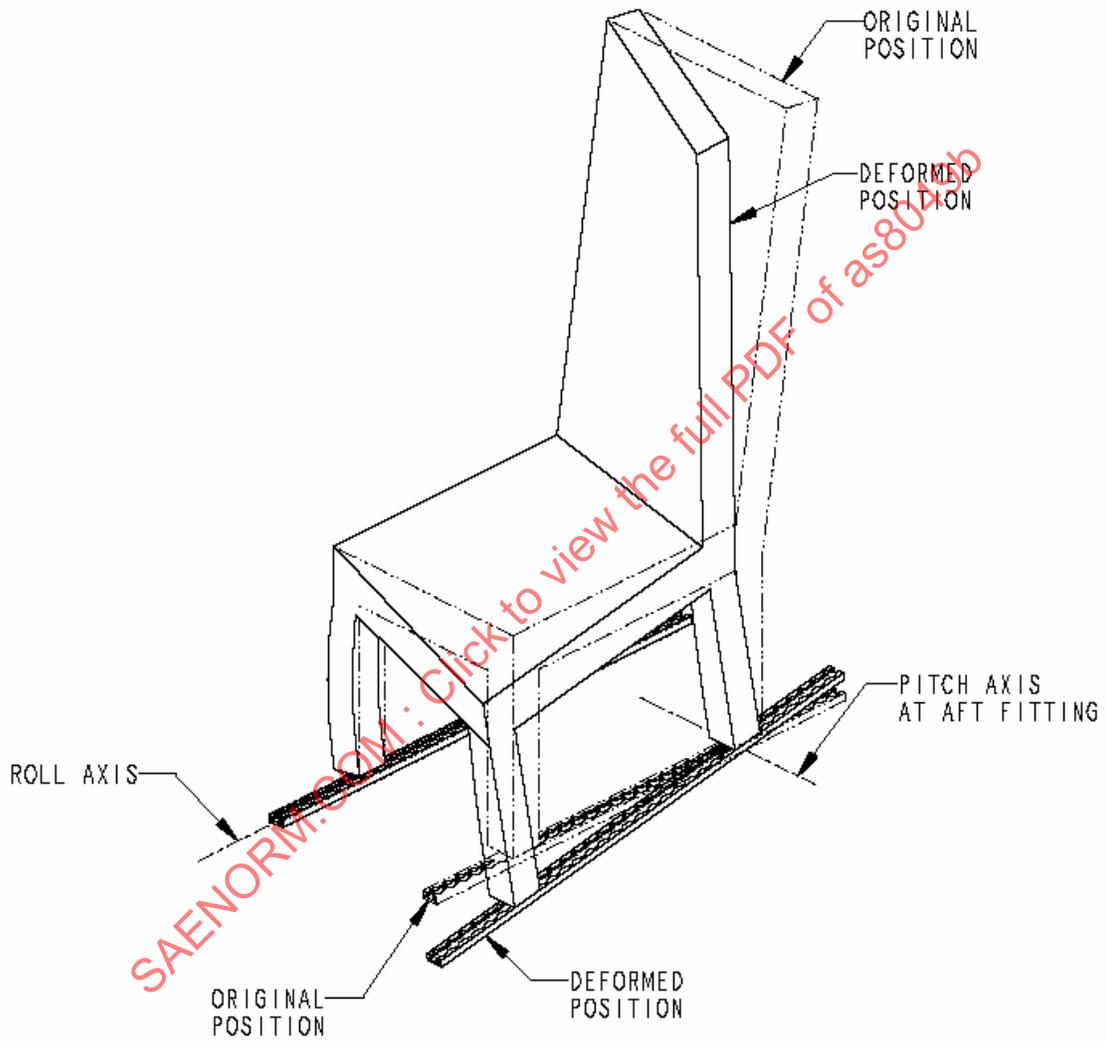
A - Schematic of Floor Deformation: Seat Legs Attached at Floor Level
